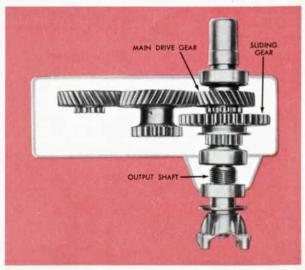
Rear Output Shaft and Sliding Gear and Clutch
